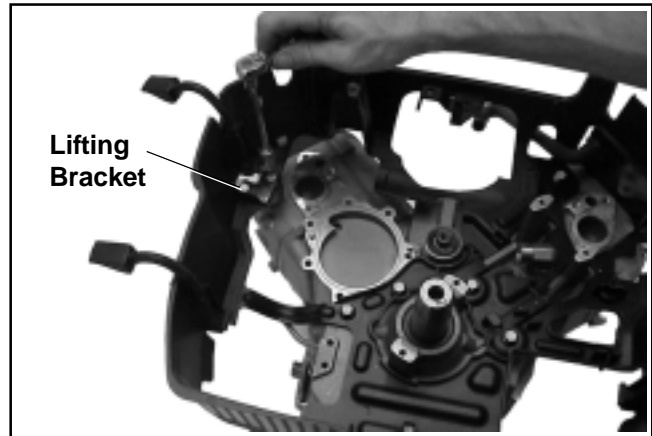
Removing Intake Manifold and Gaskets.
